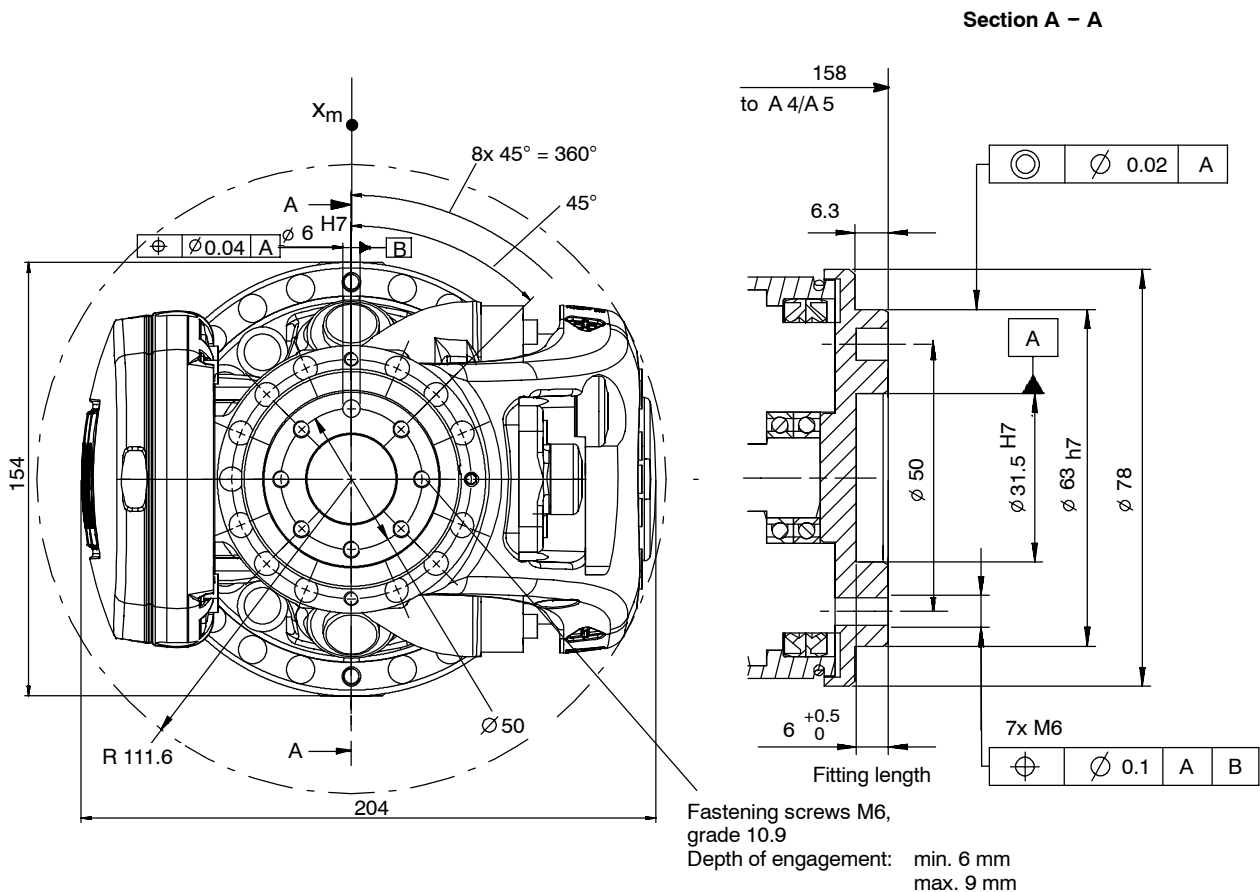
DIN/ISO mounting flange for in-line wrist 16 kg
